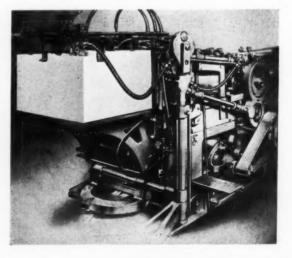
Electrical contacts of oil burner control are opened and closed by flexible shaft
